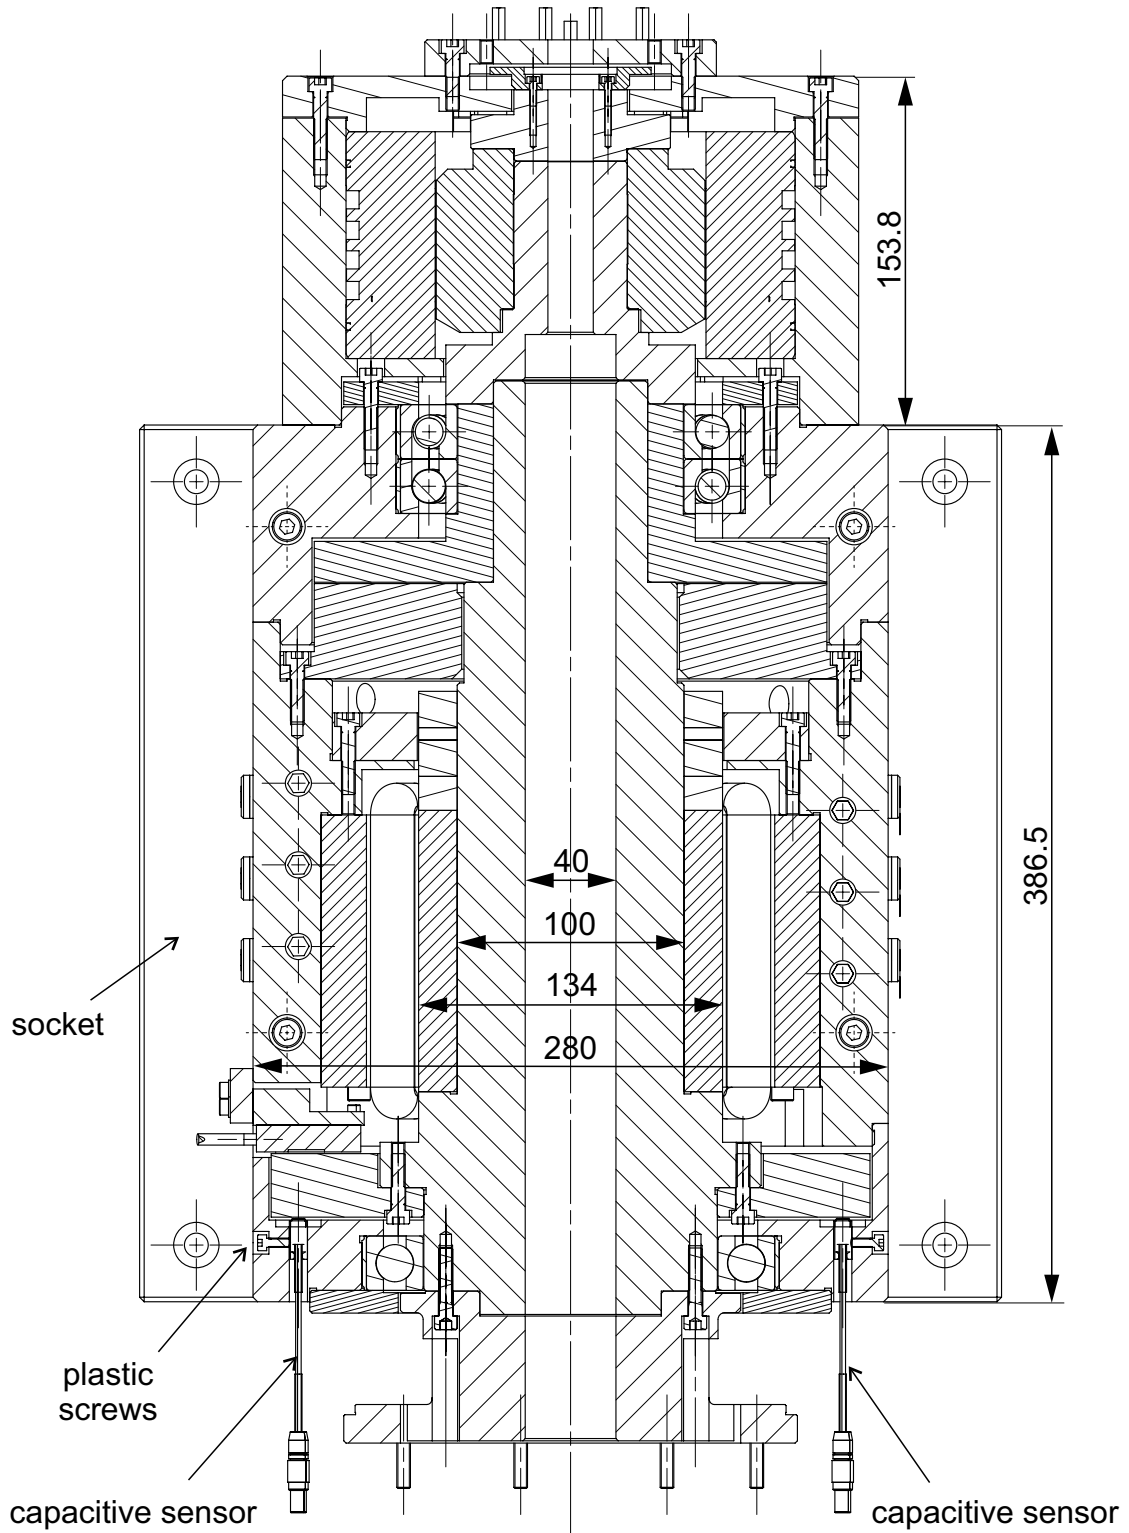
Section view of magnetic bearing spindle for patterning roller axis
